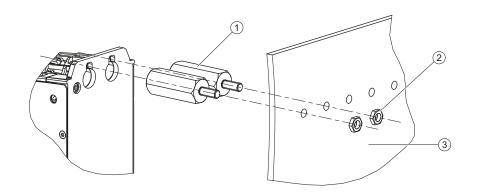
Installing a component in booksize compact format with spacing bolts (example: Motor Module booksize compact, 18 A)
